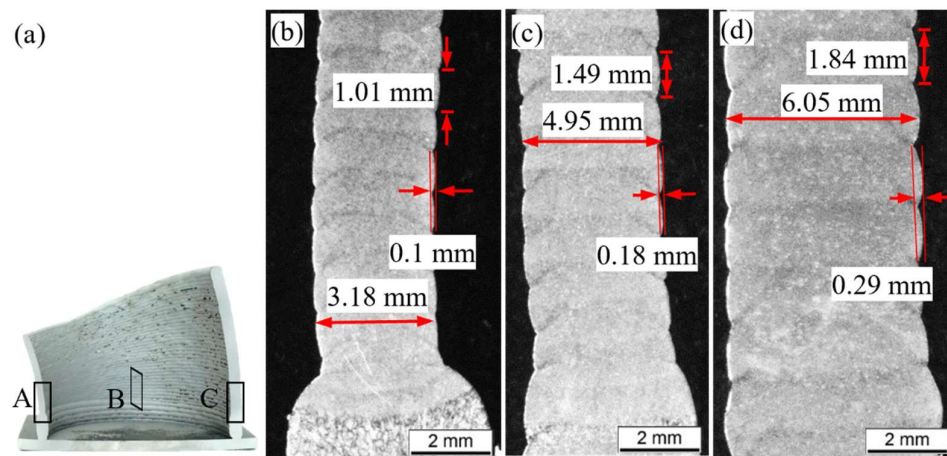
The macrostructure of the metal part: (a) intersection (grey due to sand blasting); (b) specimen A; (c) specimen B; (d) specimen C
